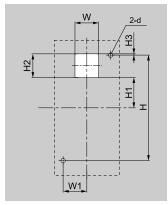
Panel Cut-Out Dimensions to Attach Outside of Control Panel
